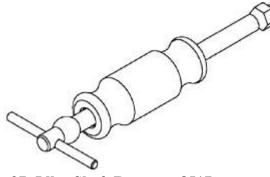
Idler Shaft Remover 8517 Courtesy of CHRYSLER LLC
